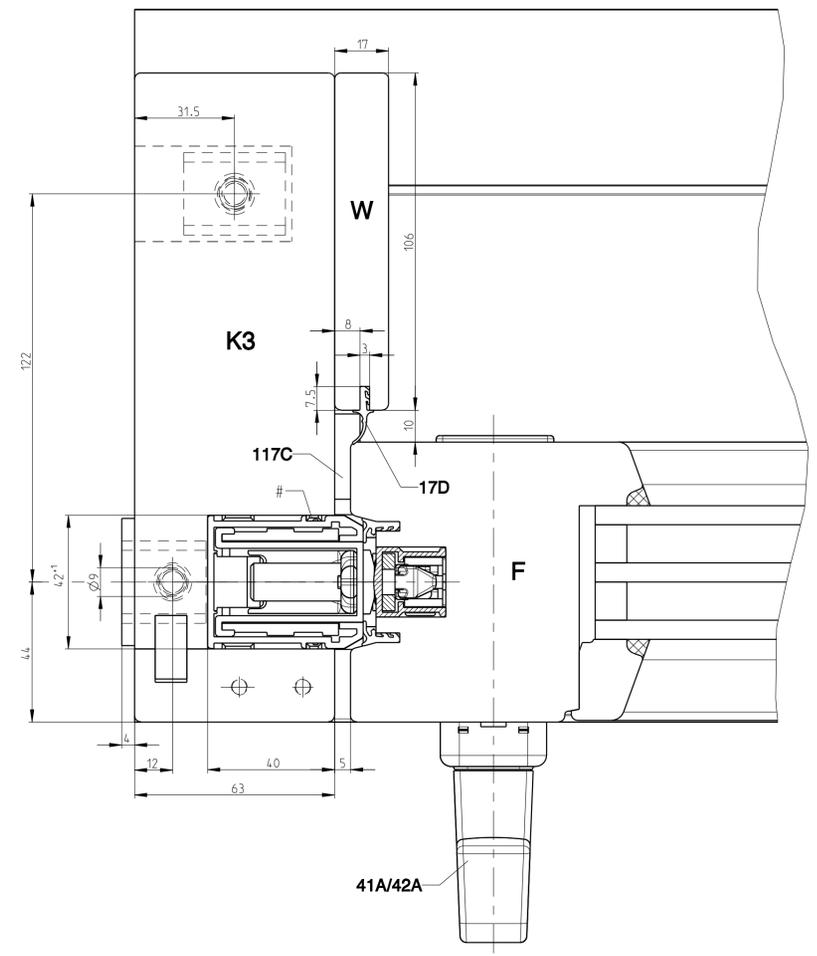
FJ-0-0 Sheet 11/15
